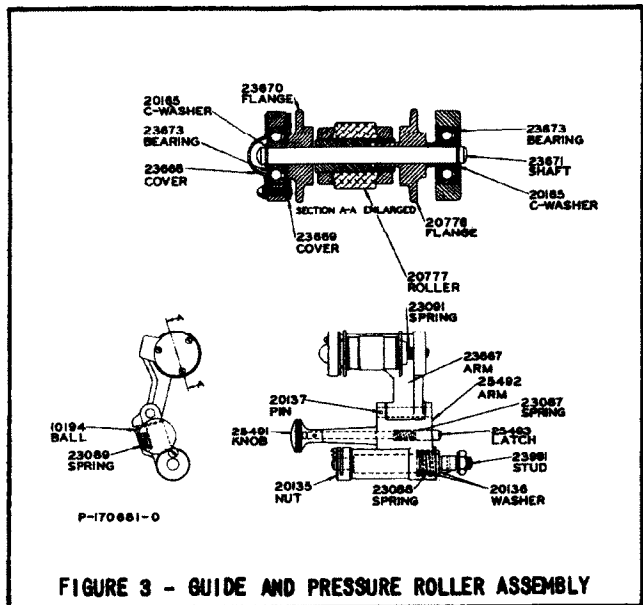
GUIDE AND PRESSURE ROLLER ASSEMBLY
